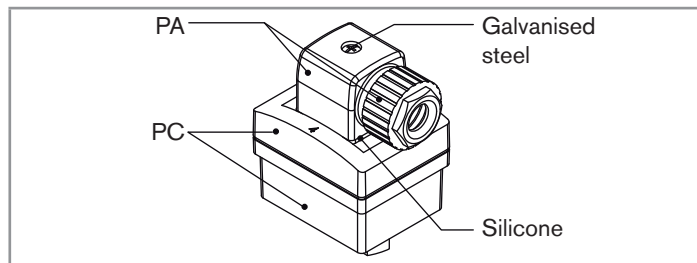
Materials exposed to ambient air in the SE30 Ex
